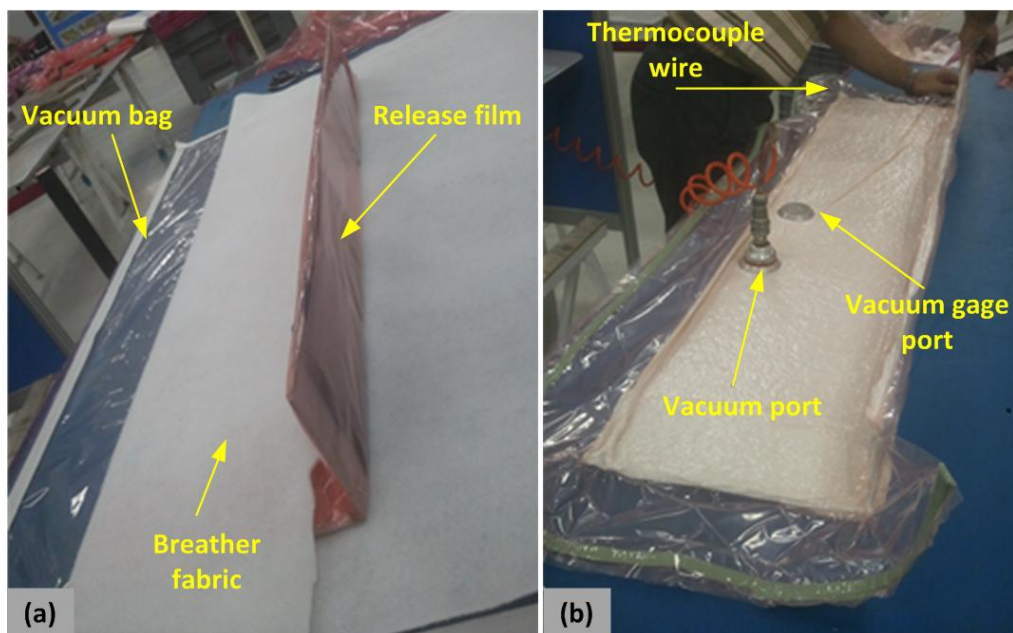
(a) Vacuum bagging process: use of vacuum bag, breather fabric, and release film, (b) After vacuum bagging process: use of vacuum port, vacuum gage port, and thermocouple wire.
